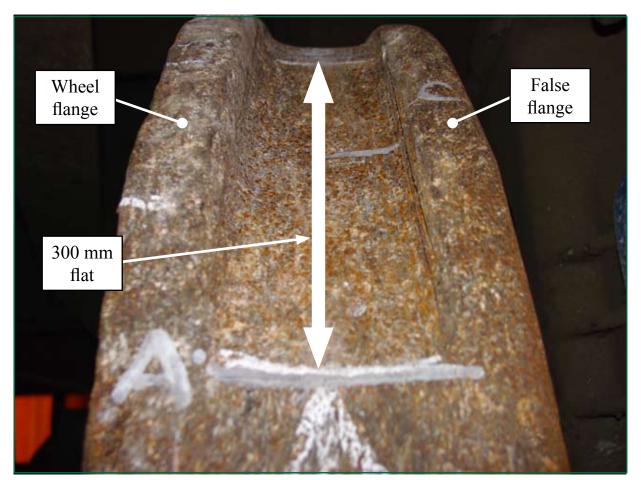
Large wheel flat and false flange on right leading wheel of SSA 470028
